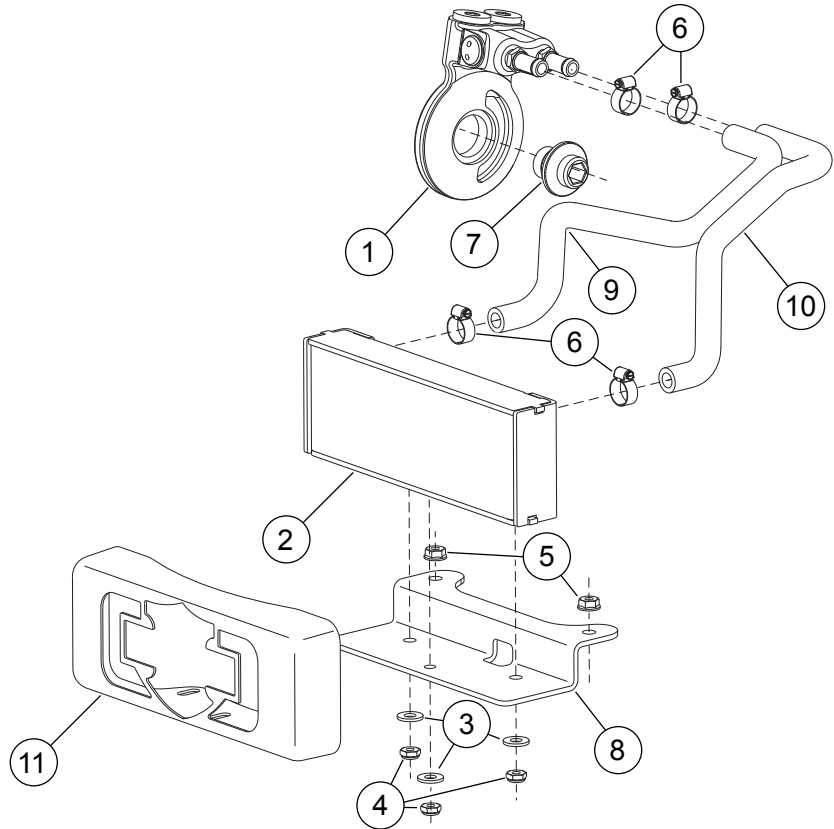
Service Parts for Touring Oil Cooler Kit with Chrome Oil Cooler Cover
